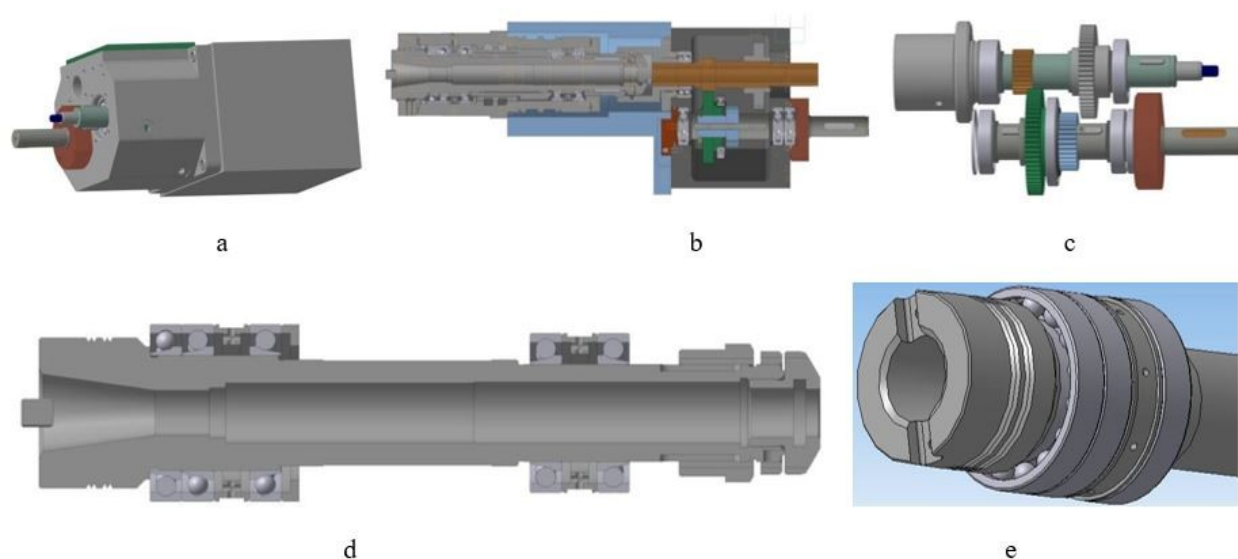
Main drive of the machine: a) general view; b) section of the drive with spindle; c) kinematics; d) spindle; e) front support
